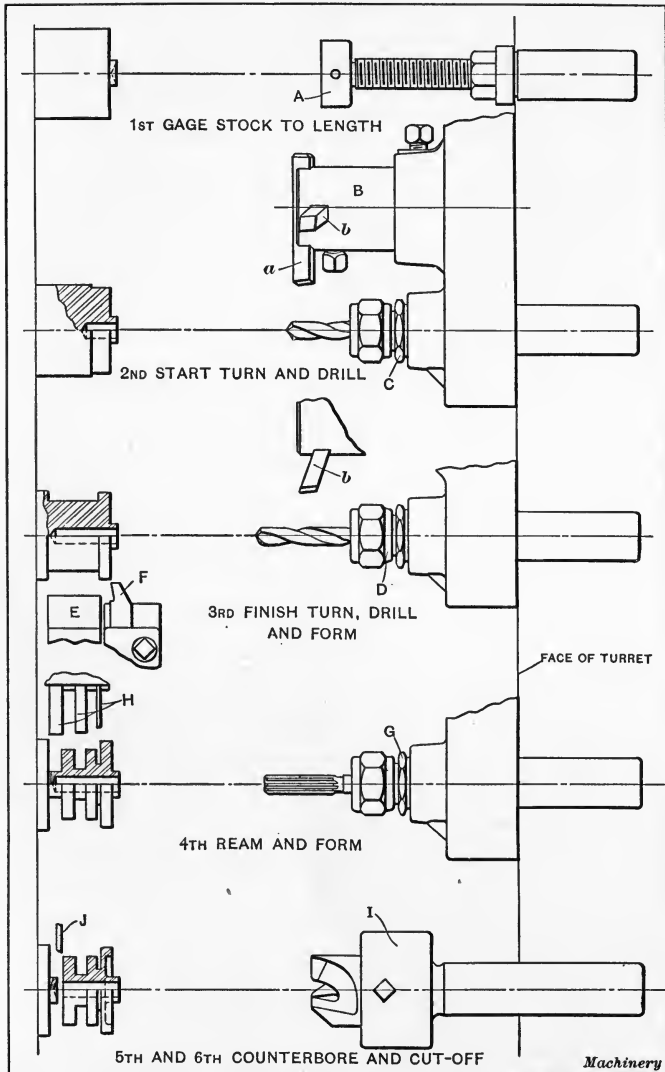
Successive Operations for Producing the Twin Gear Blank Shown at C in Fig. 18
